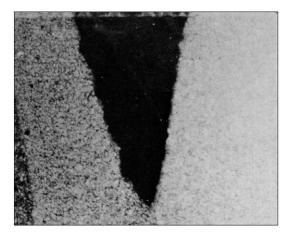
Grooving at the welded part of carbon steel
